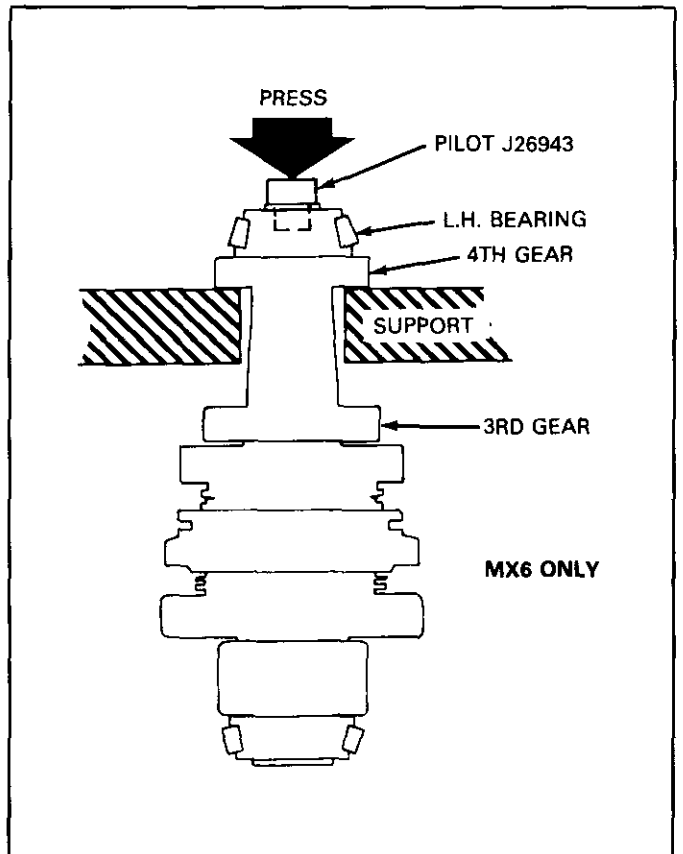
Removing L.H. Brg. and 3rd/4th Gear (Output)
